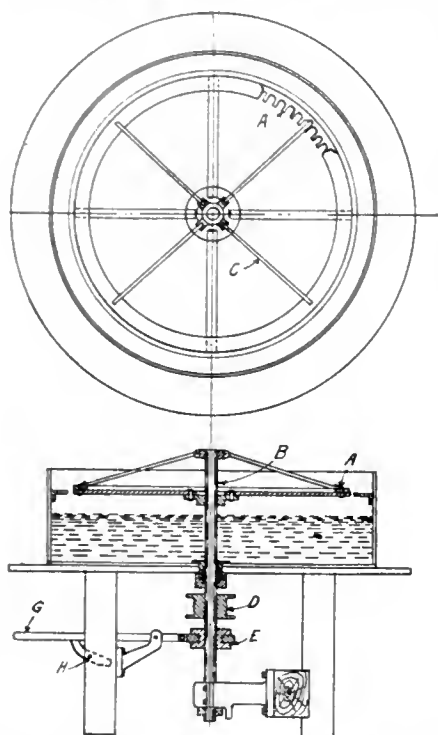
PLAN AND SECTIONAL VIEW OF LACQUERING MACHINE.
